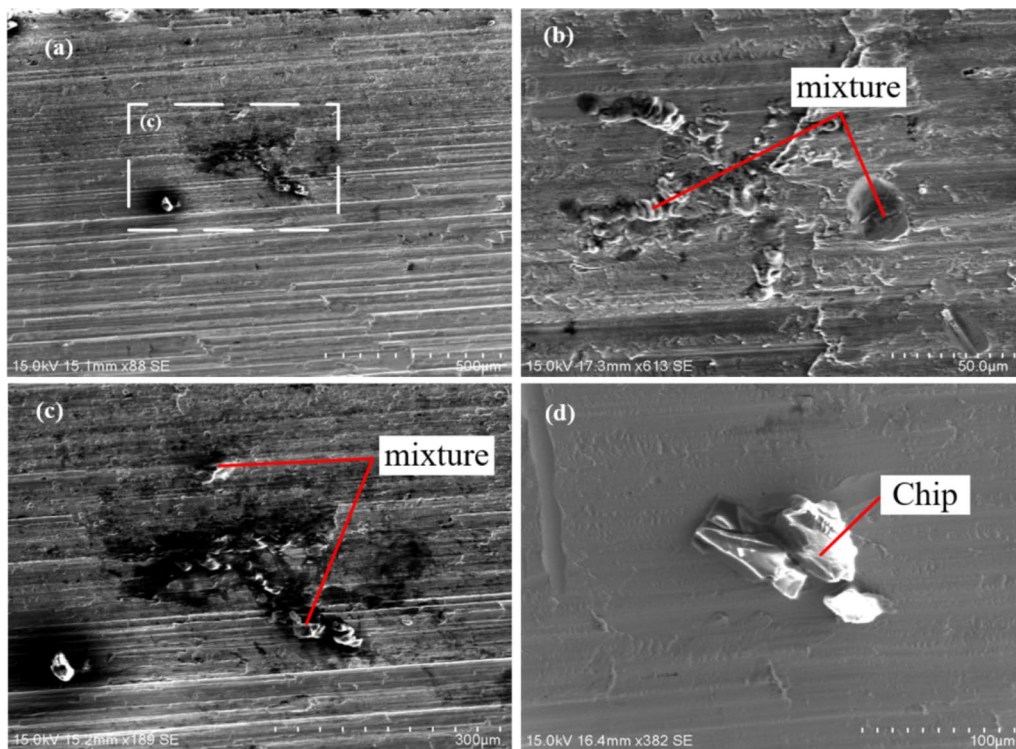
Surface adhesion of contour tooth bevel gear in dry milling
